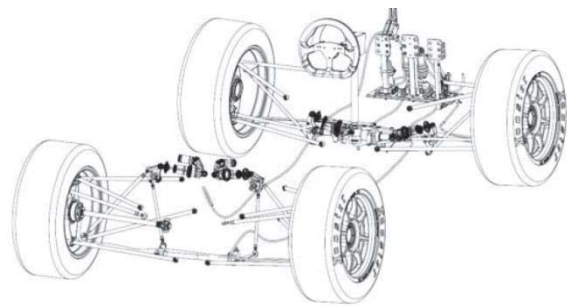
32 Rear view Dragon 4 suspension layout. Rear axle is push-rod solution
